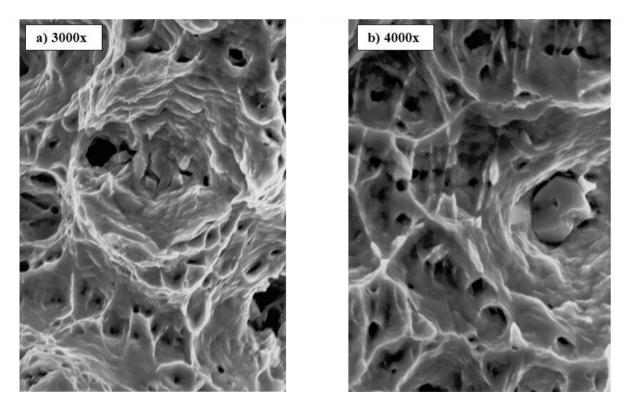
a) b) Ductile fractures of industrial bronze type CuSn6Zr modified with zirconium from extreme strip segments after hot rolling
